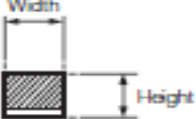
Test specimen location for deposited weld metal hardness
